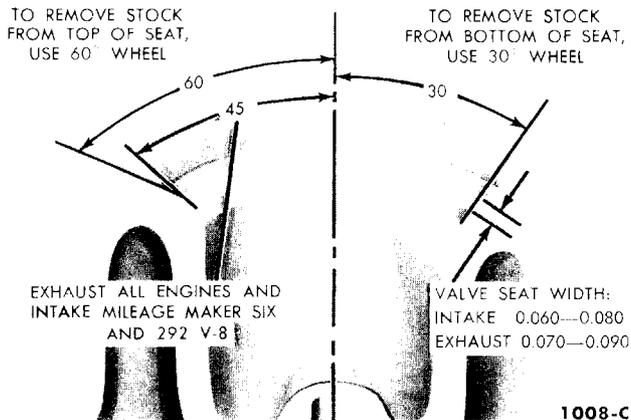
Valve Seat Refacing—Exhaust All Engines and Intake Mileage Maker Six and Thunderbird 292 V-8
